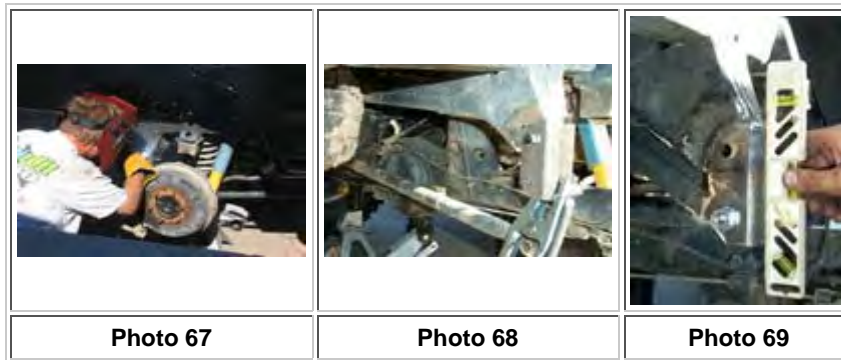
Steve welding on the PanHard drop bracket.
